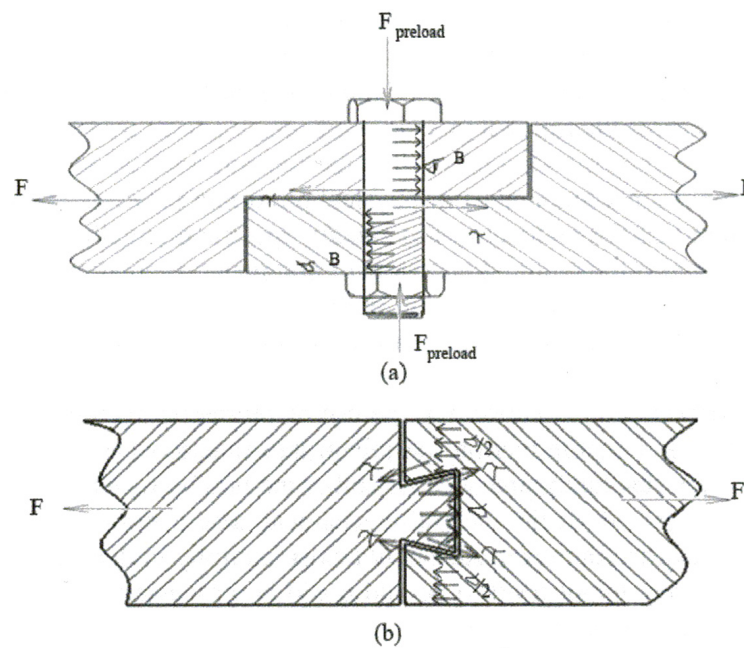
Integral Mechanical Attachment - A mechanical connection between parts is established through integral, geometric features (b), instead of additional fasteners (a). Illustration taken from [Mes06, p.9]
